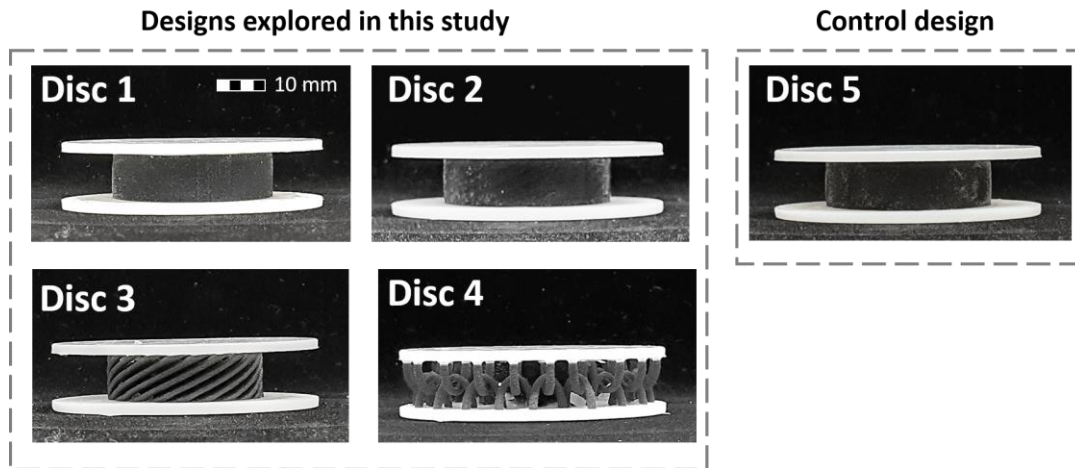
Examples of 3D printed specimens of the five ASD designs. The specimens are manufactured with the “matte” print option. The support material of the specimens is removed right after printing using a water-jet and the specimens are stored in a dark place for about 24 hours before mechanical testing. Five specimens of each ASD design are fabricated for the subsequent mechanical testing.
